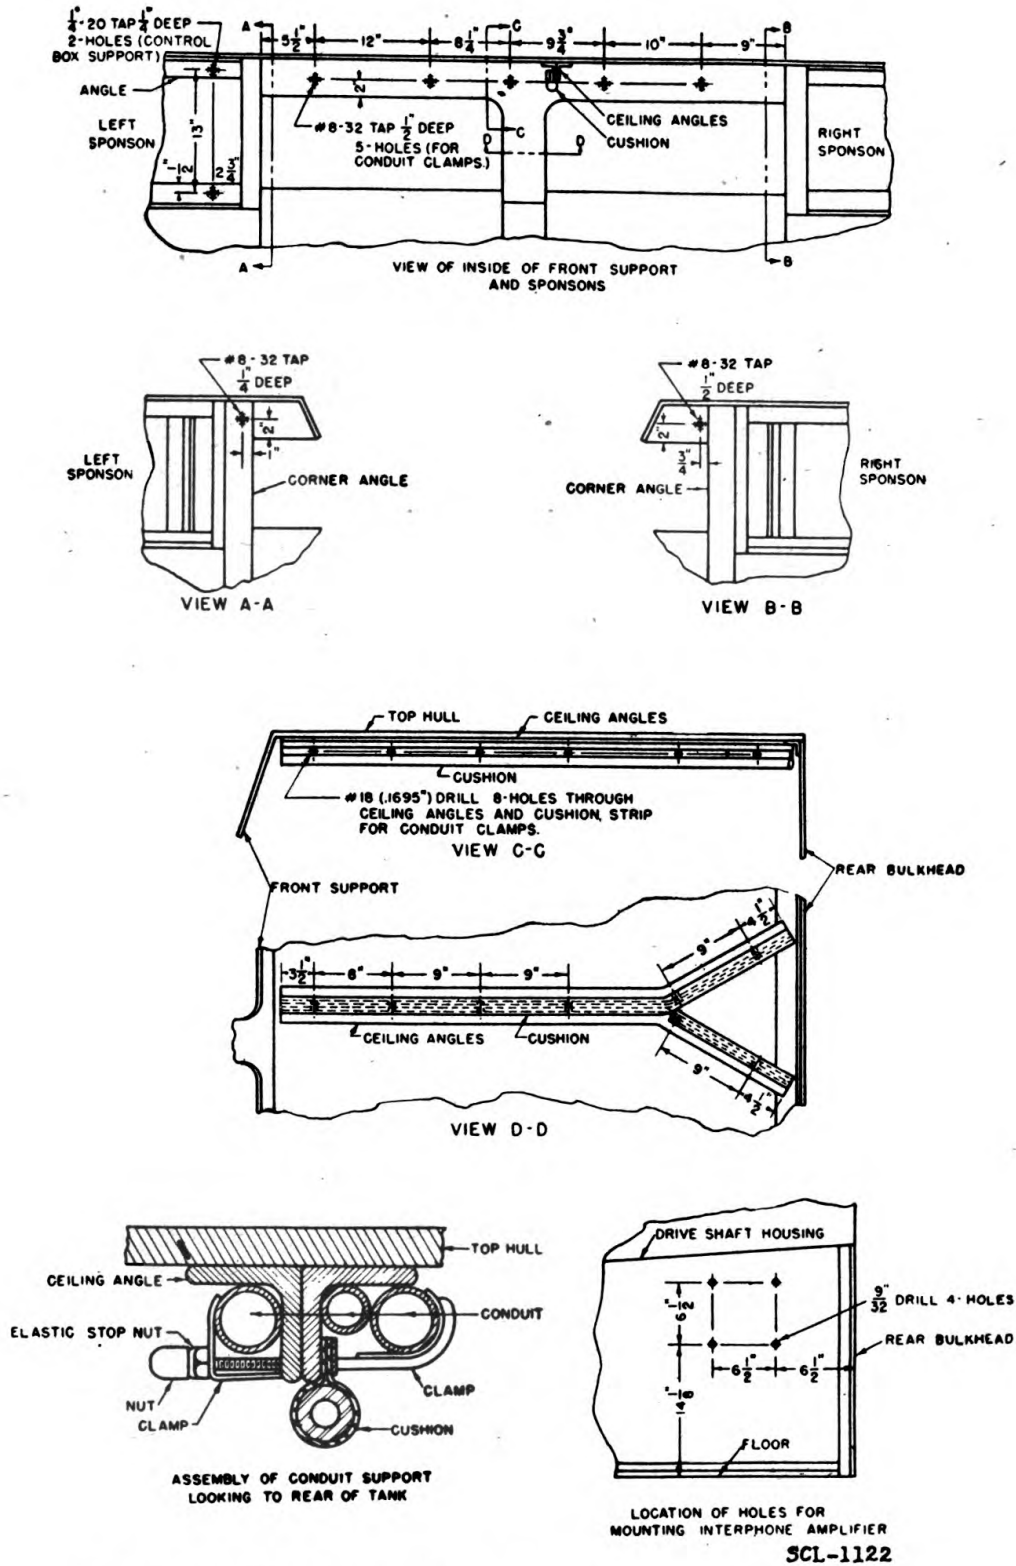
Mounting holes and location for interphone equipment in light tank M2A3.
